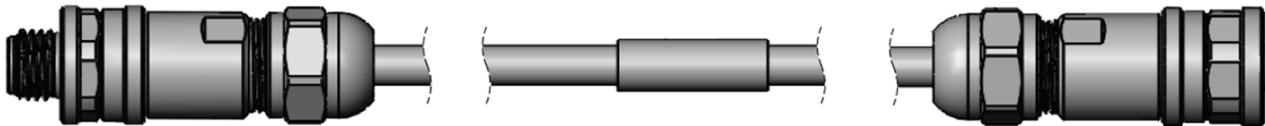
VitalyX PS Trunk Cable Assembly (OS-05-04-76)
